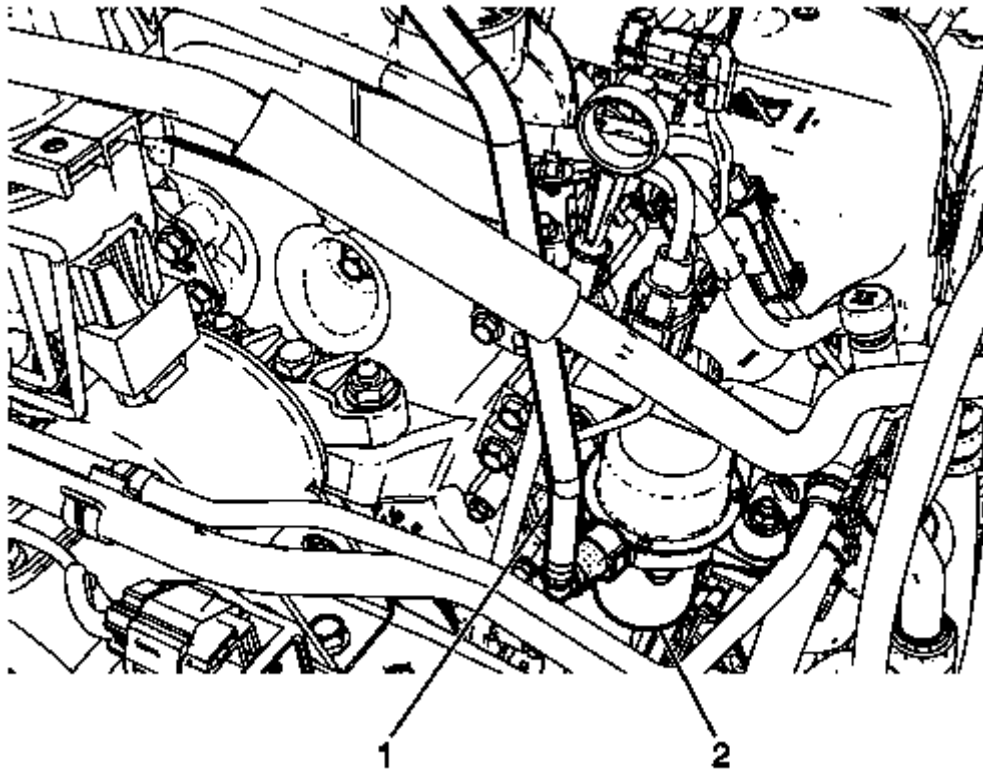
Vacuum Pump Hose And Vacuum Pump
